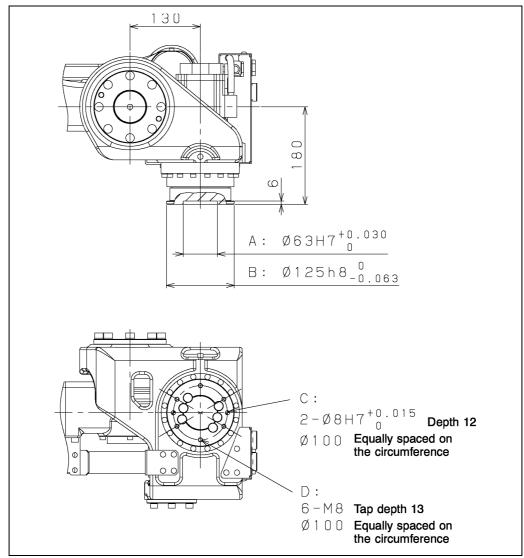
(a) End effector mounting Face (M-420iA Standard/2nd food)
